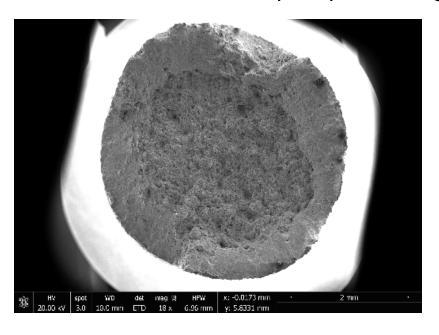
Fracture surface images for calibration tensile bar SR+HIP+HT
